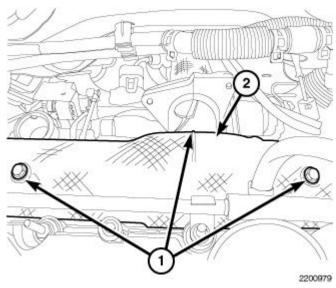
Intake Manifold & Thermostat Housing Courtesy of CHRYSLER LLC
